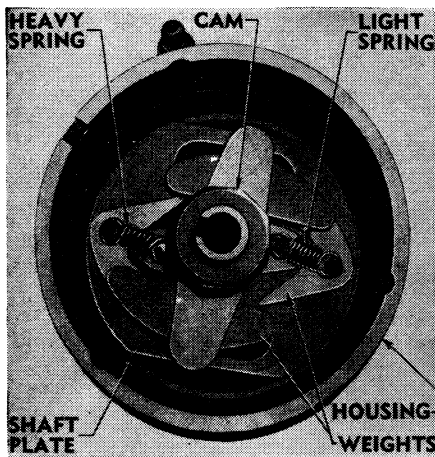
Top view of Delco-Remy distributor with breaker plate removed to show centrifugal governor mechanism
